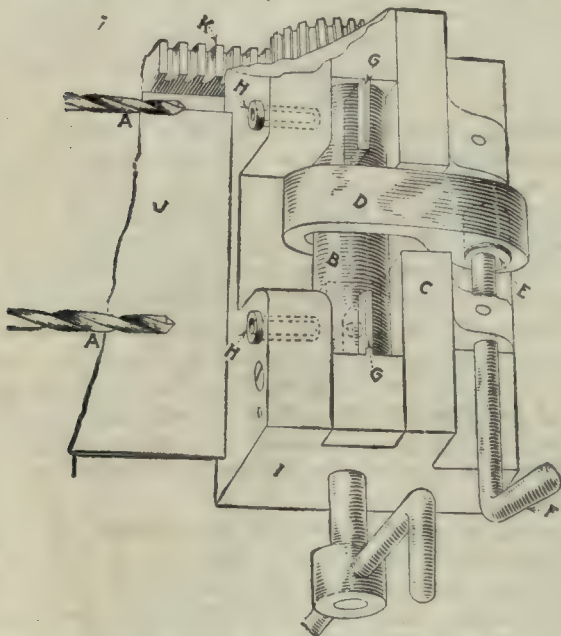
ONE OF THE "MANUFACTURING" DRILLING JIGS
